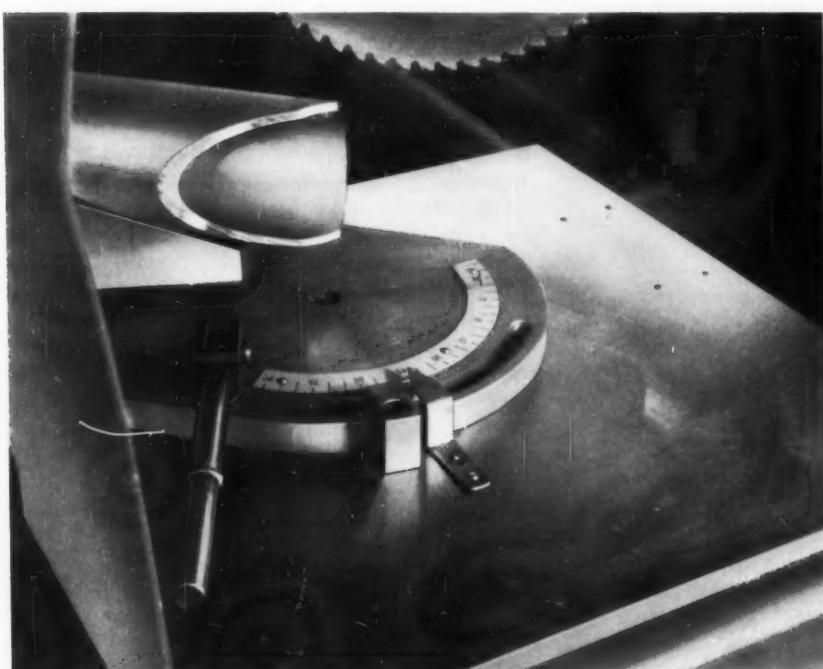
Special fixture on this cutoff machine holds an aluminum pipe in position for the third and final cut. Cutter is a 20-inch diameter, carbide-tooth saw.
